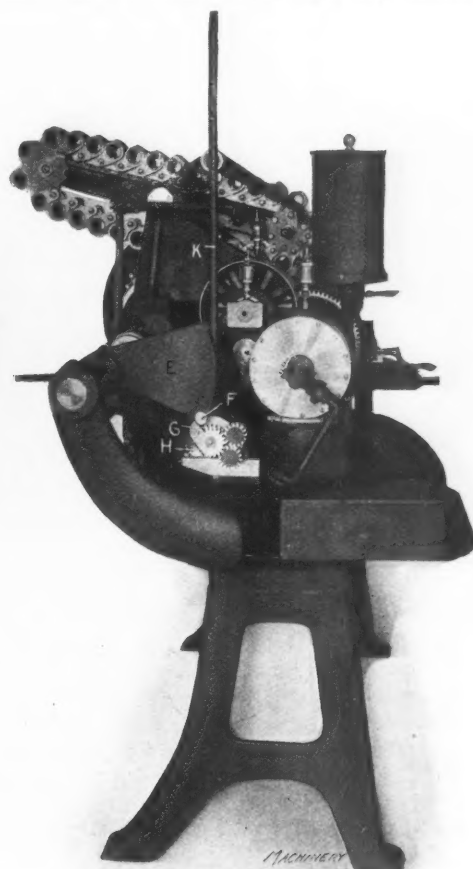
End View of Machine showing Mechanism for controlling Air Chuck
